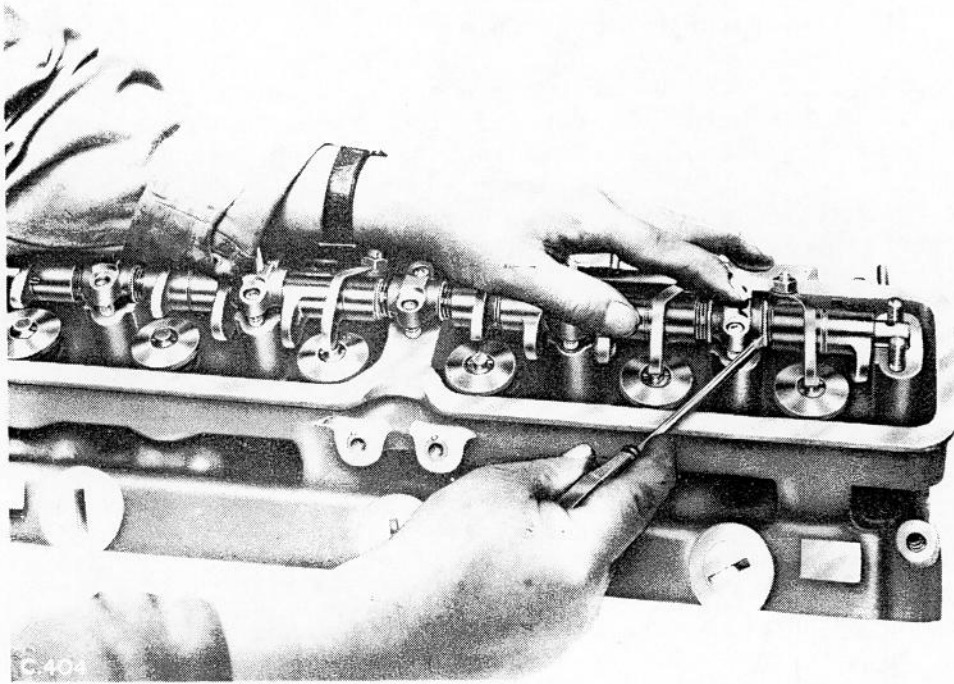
Fitting inlet rocker spindle assembly (Stage 4)
